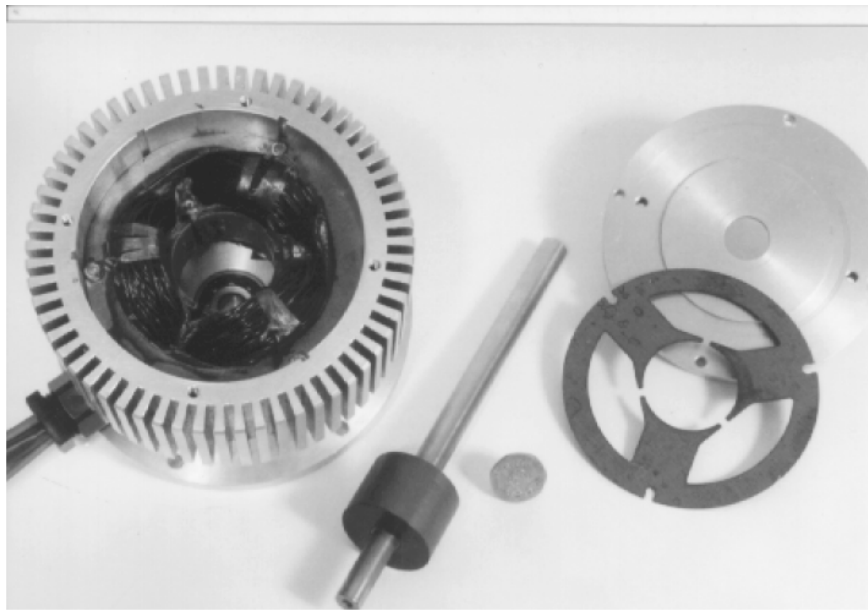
6. Prototype 2-pole brushless AC machine before assembly
